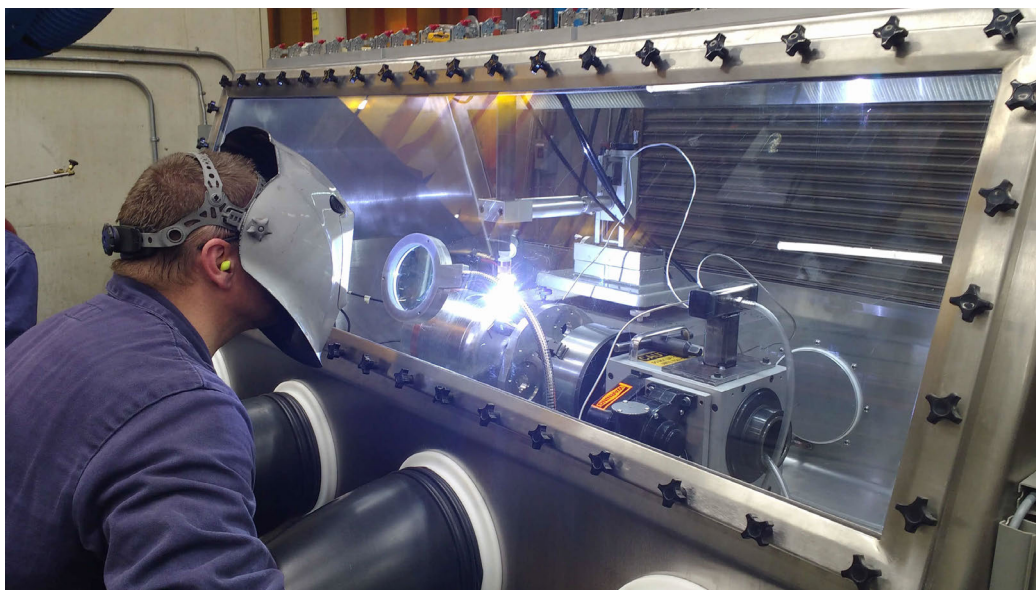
The glove box used for cavity fabrication. Pictured here is the welder, Neil Thiem, performing the final weld on the separator cavity.
